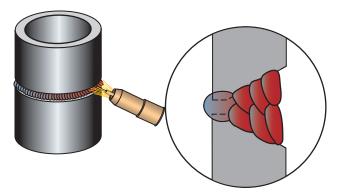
Filler weld sequence for 2G position.
